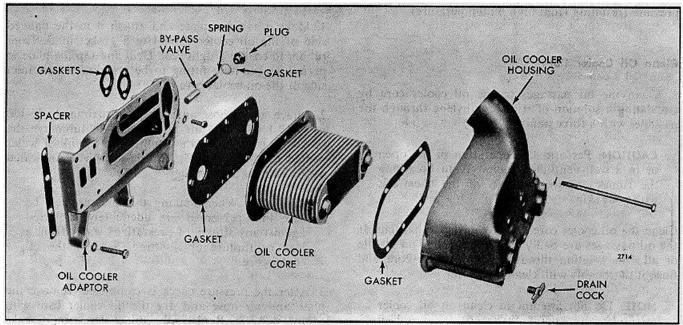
Typical Oil Cooler Details and Relative Location of Parts
